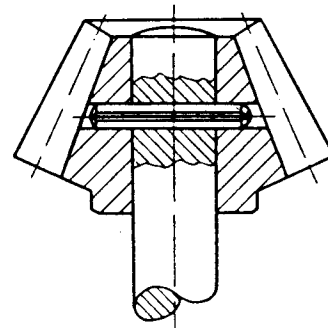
Use as radial pin for connecting a bevel wheel to a shaft
